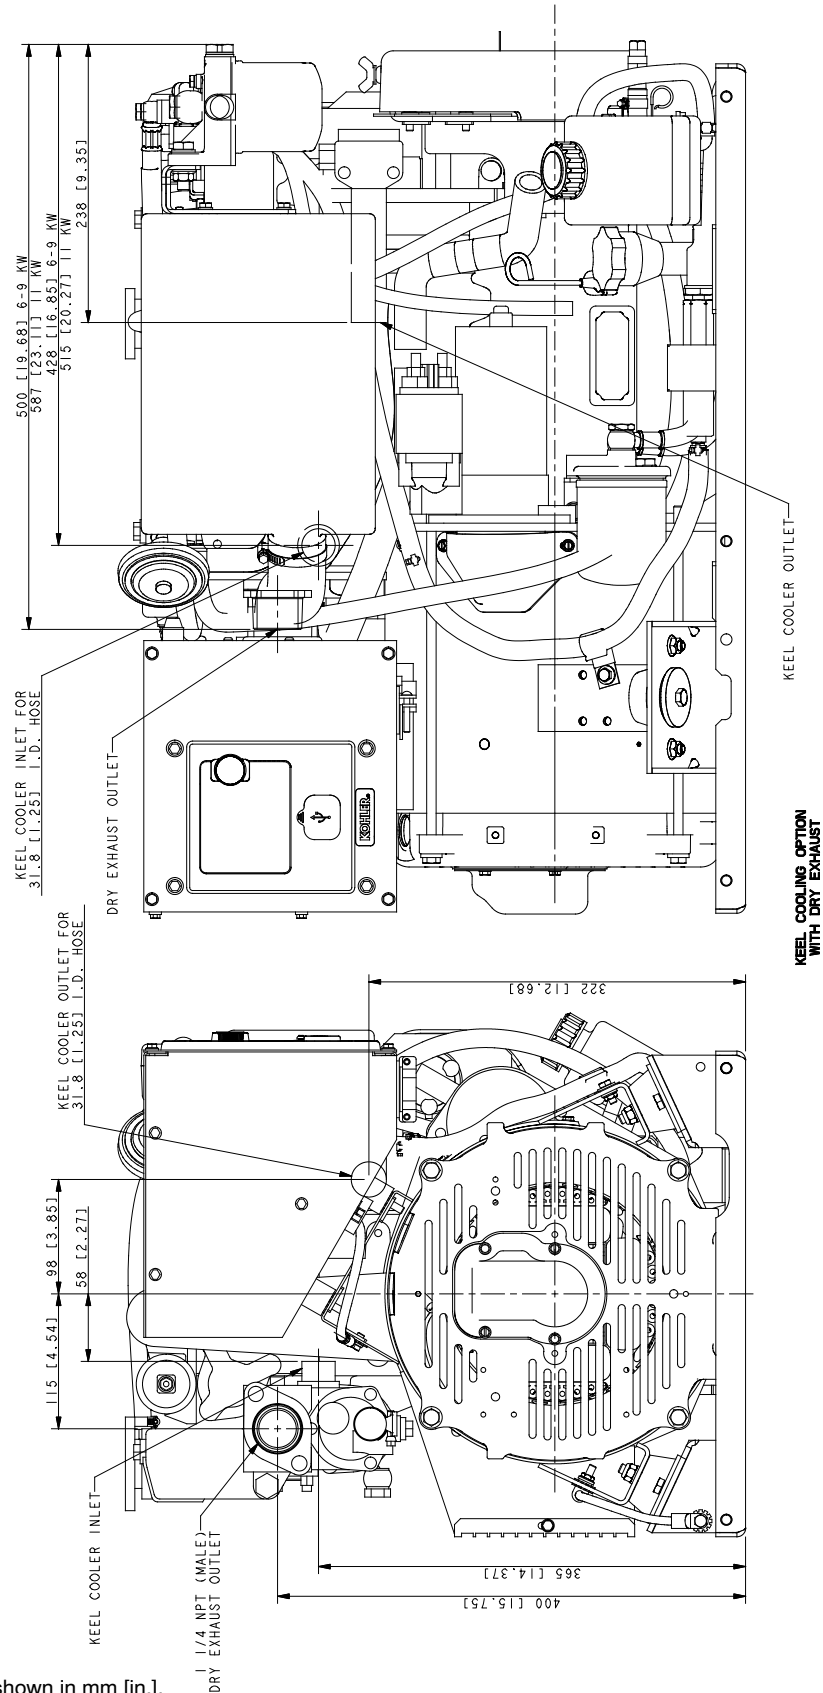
Dimension Drawing, 6EKOD/5EFKOD, 9-11EKOZD, and 7-9EFKOZD with Sound Shield
